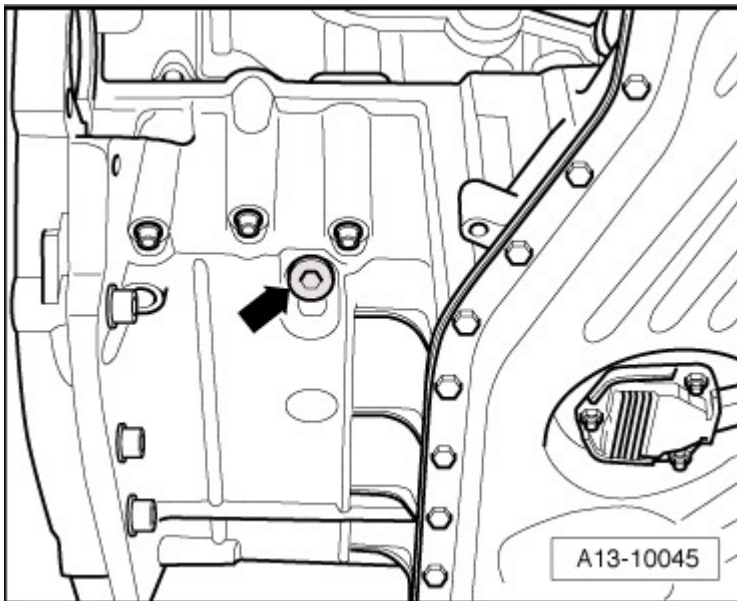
Identifying Locking Bolt Of Upper Part Of Oil Pan
